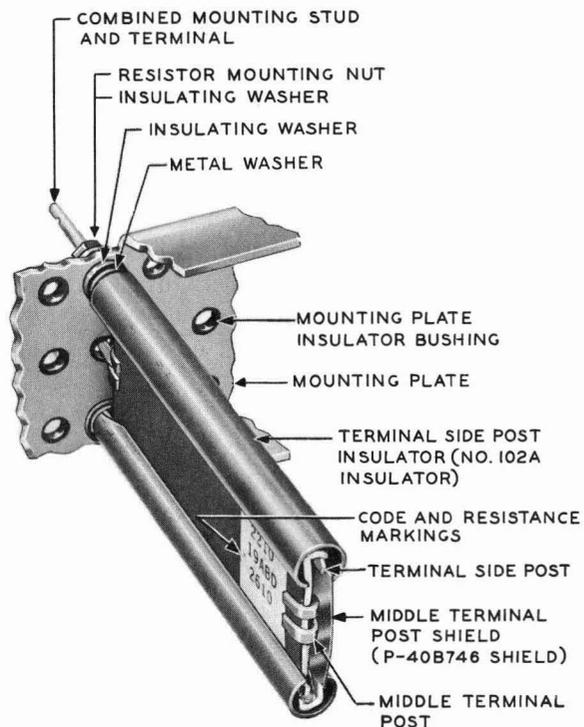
Mounting of 18- and 19-type Double Stud Resistors on Mounting Plate Equipped With Insulator Bushings — (19-type Resistor Equipped With Terminal Side Post Insulators and Middle Post Shield Shown)
